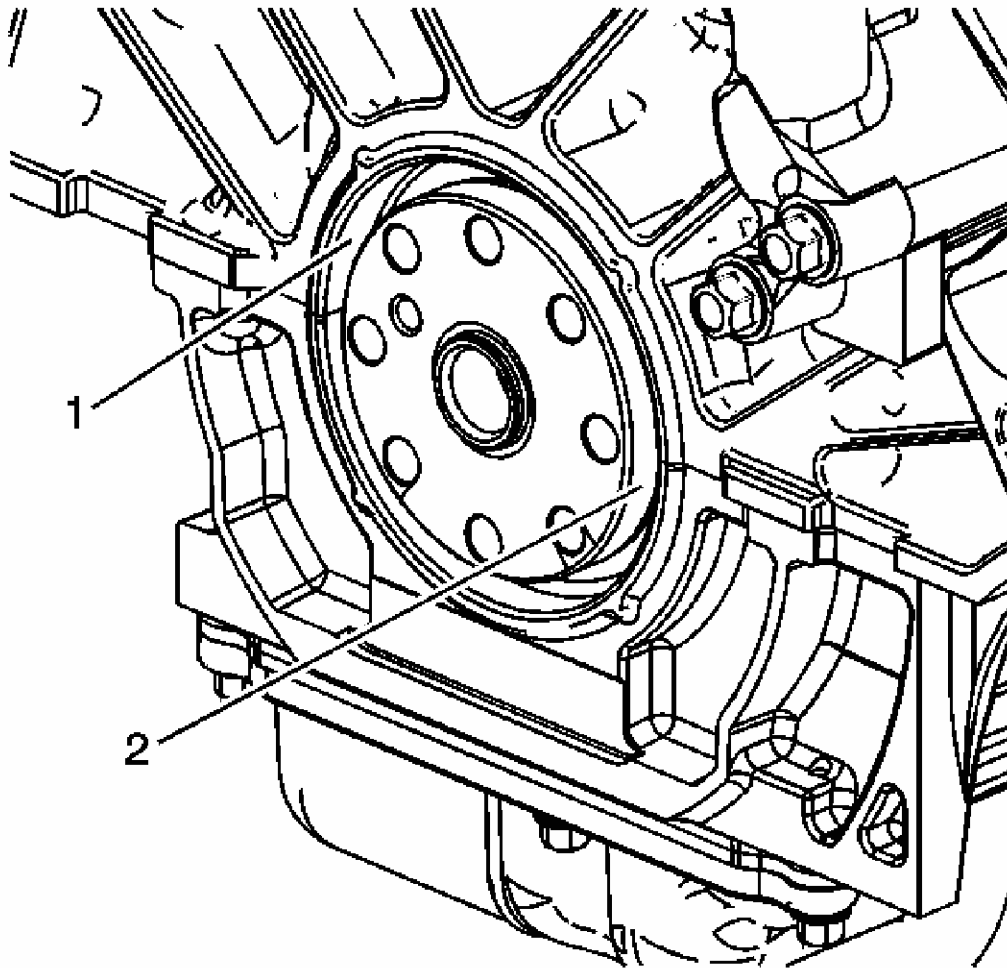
Identifying Rear Crankshaft Seal Bore & Flange
